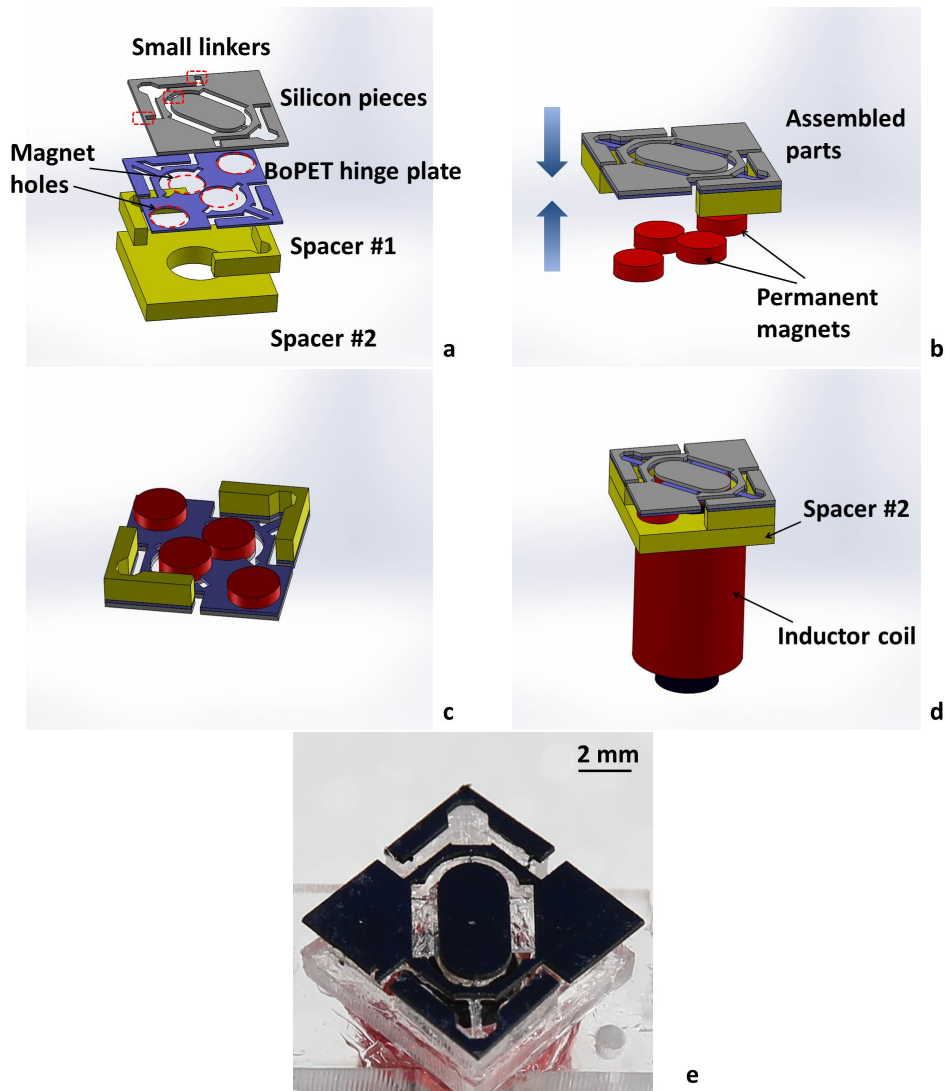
(a) through (d): fabrication and assembly process; (e) assembled prototype.
